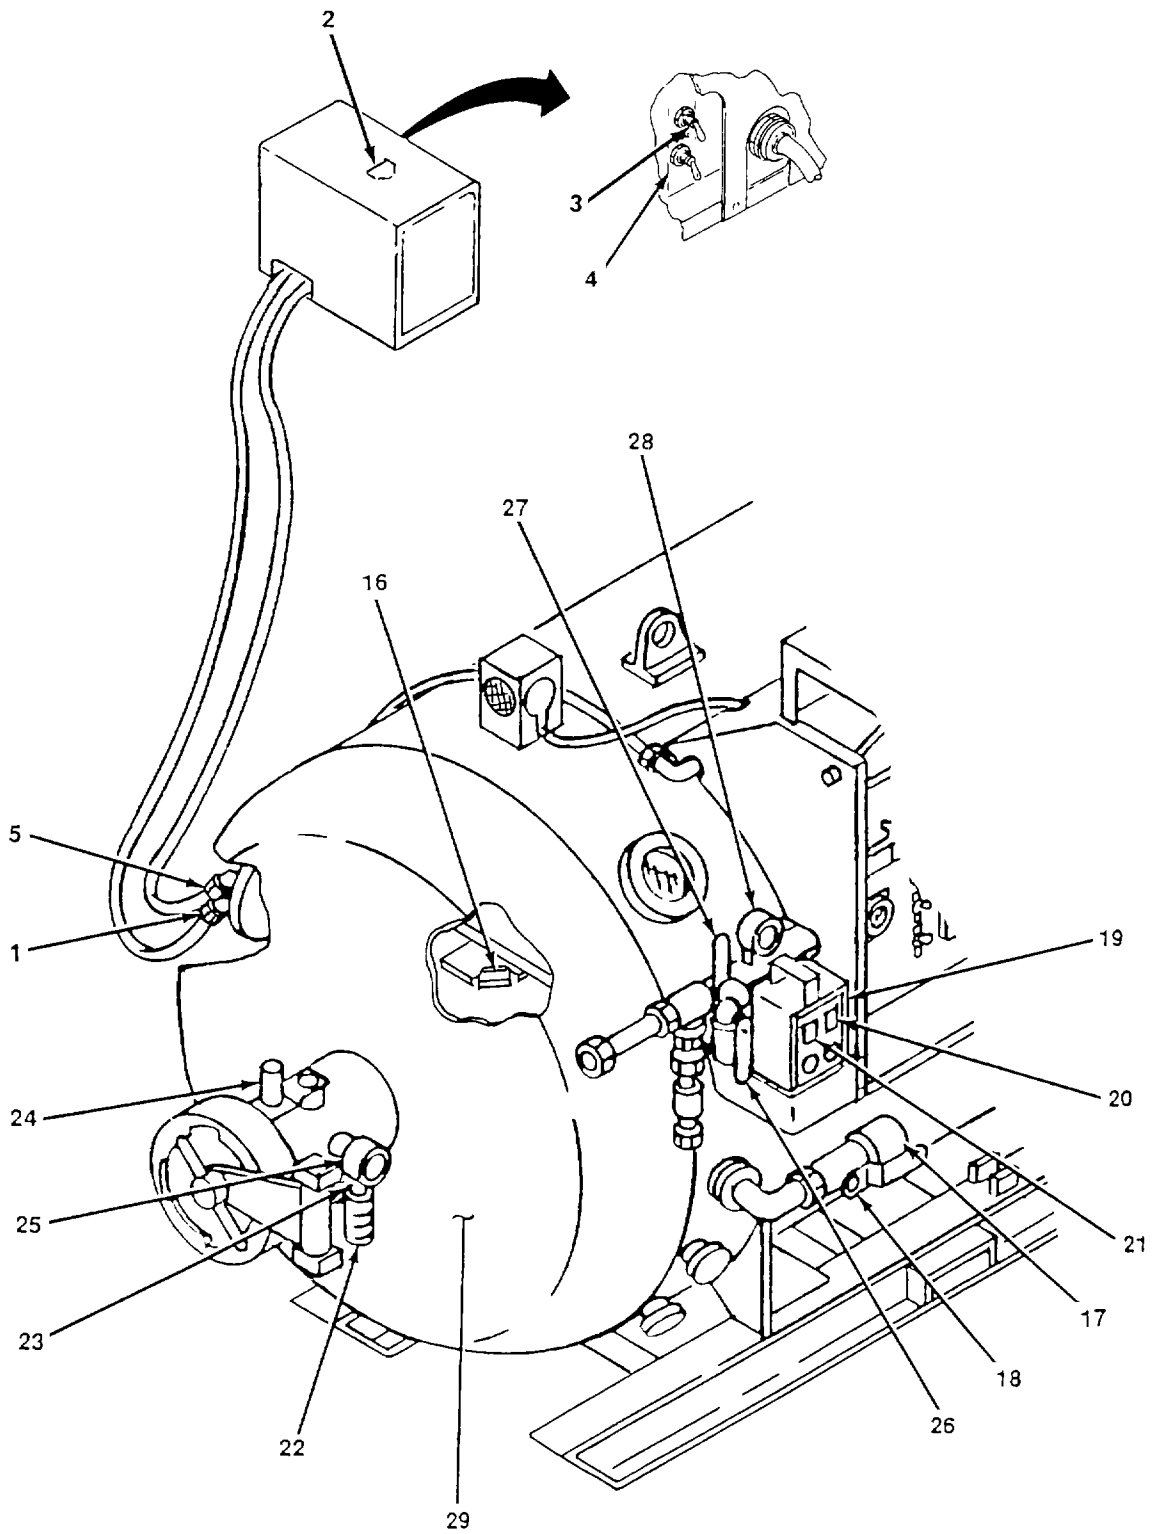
Gages, Valves, and Switches Controls and Indicators (Sheet 1 of 2).
